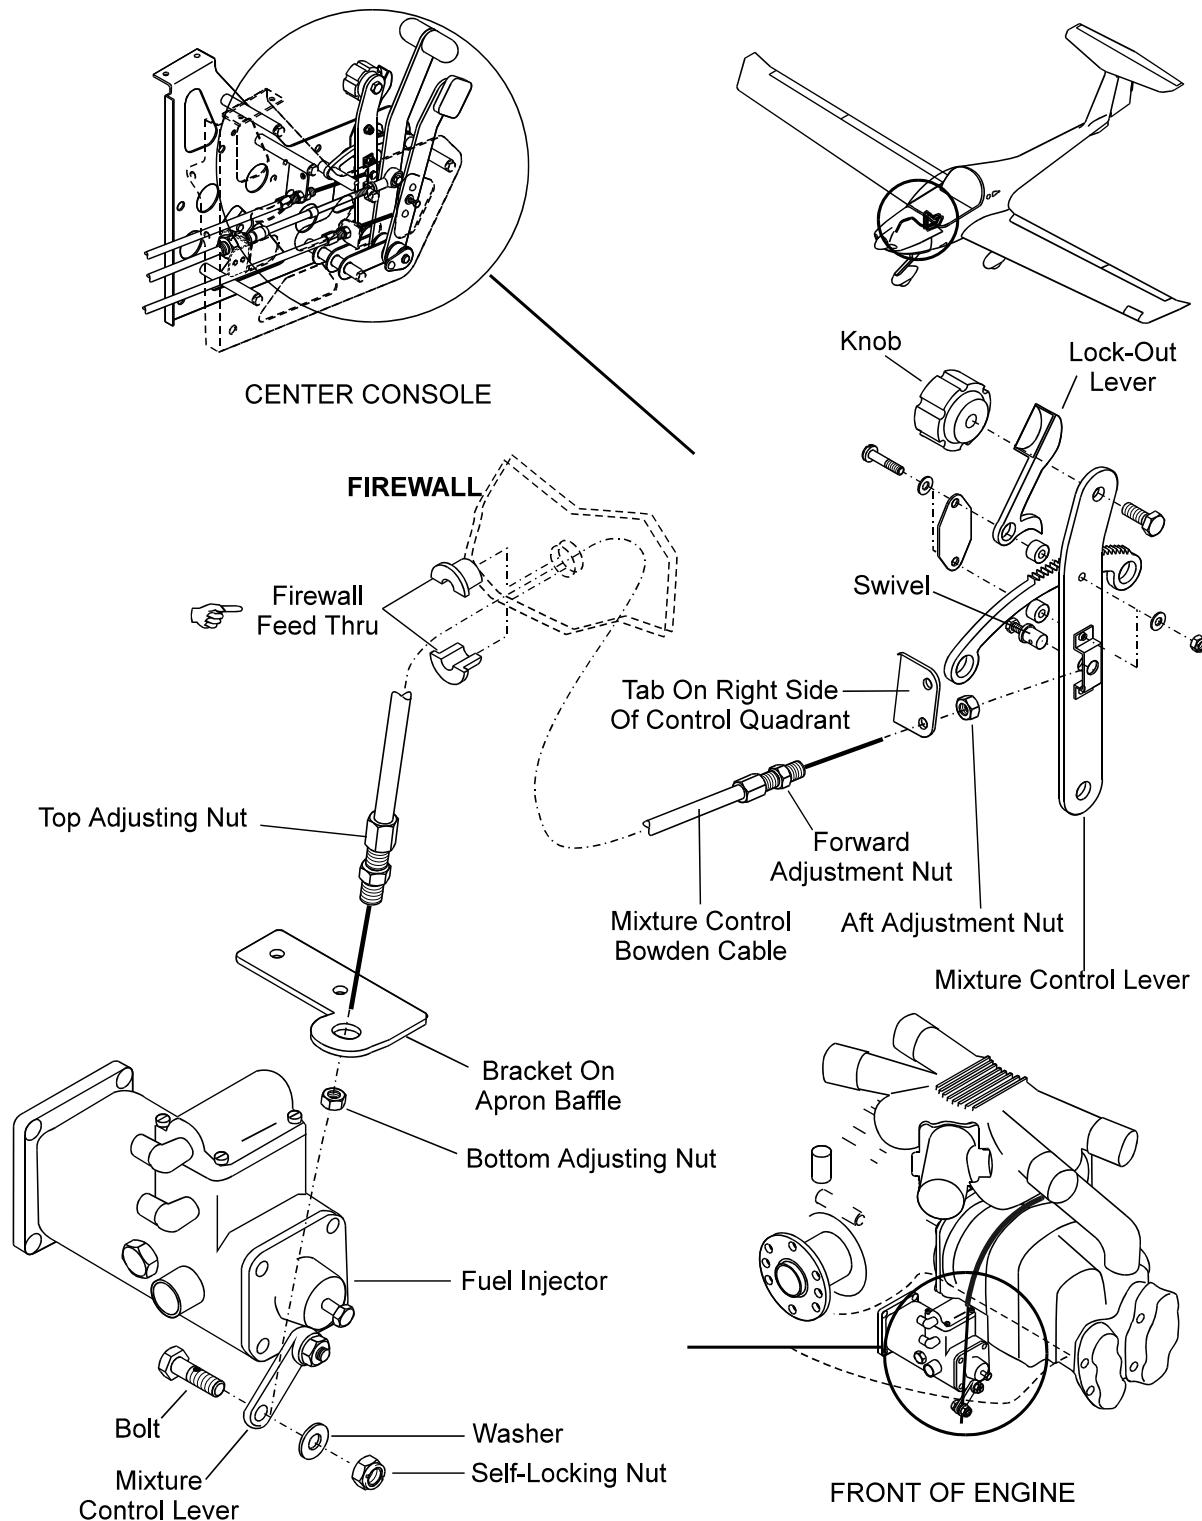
Mixture Control Installation (Sheet 1 of 2)
